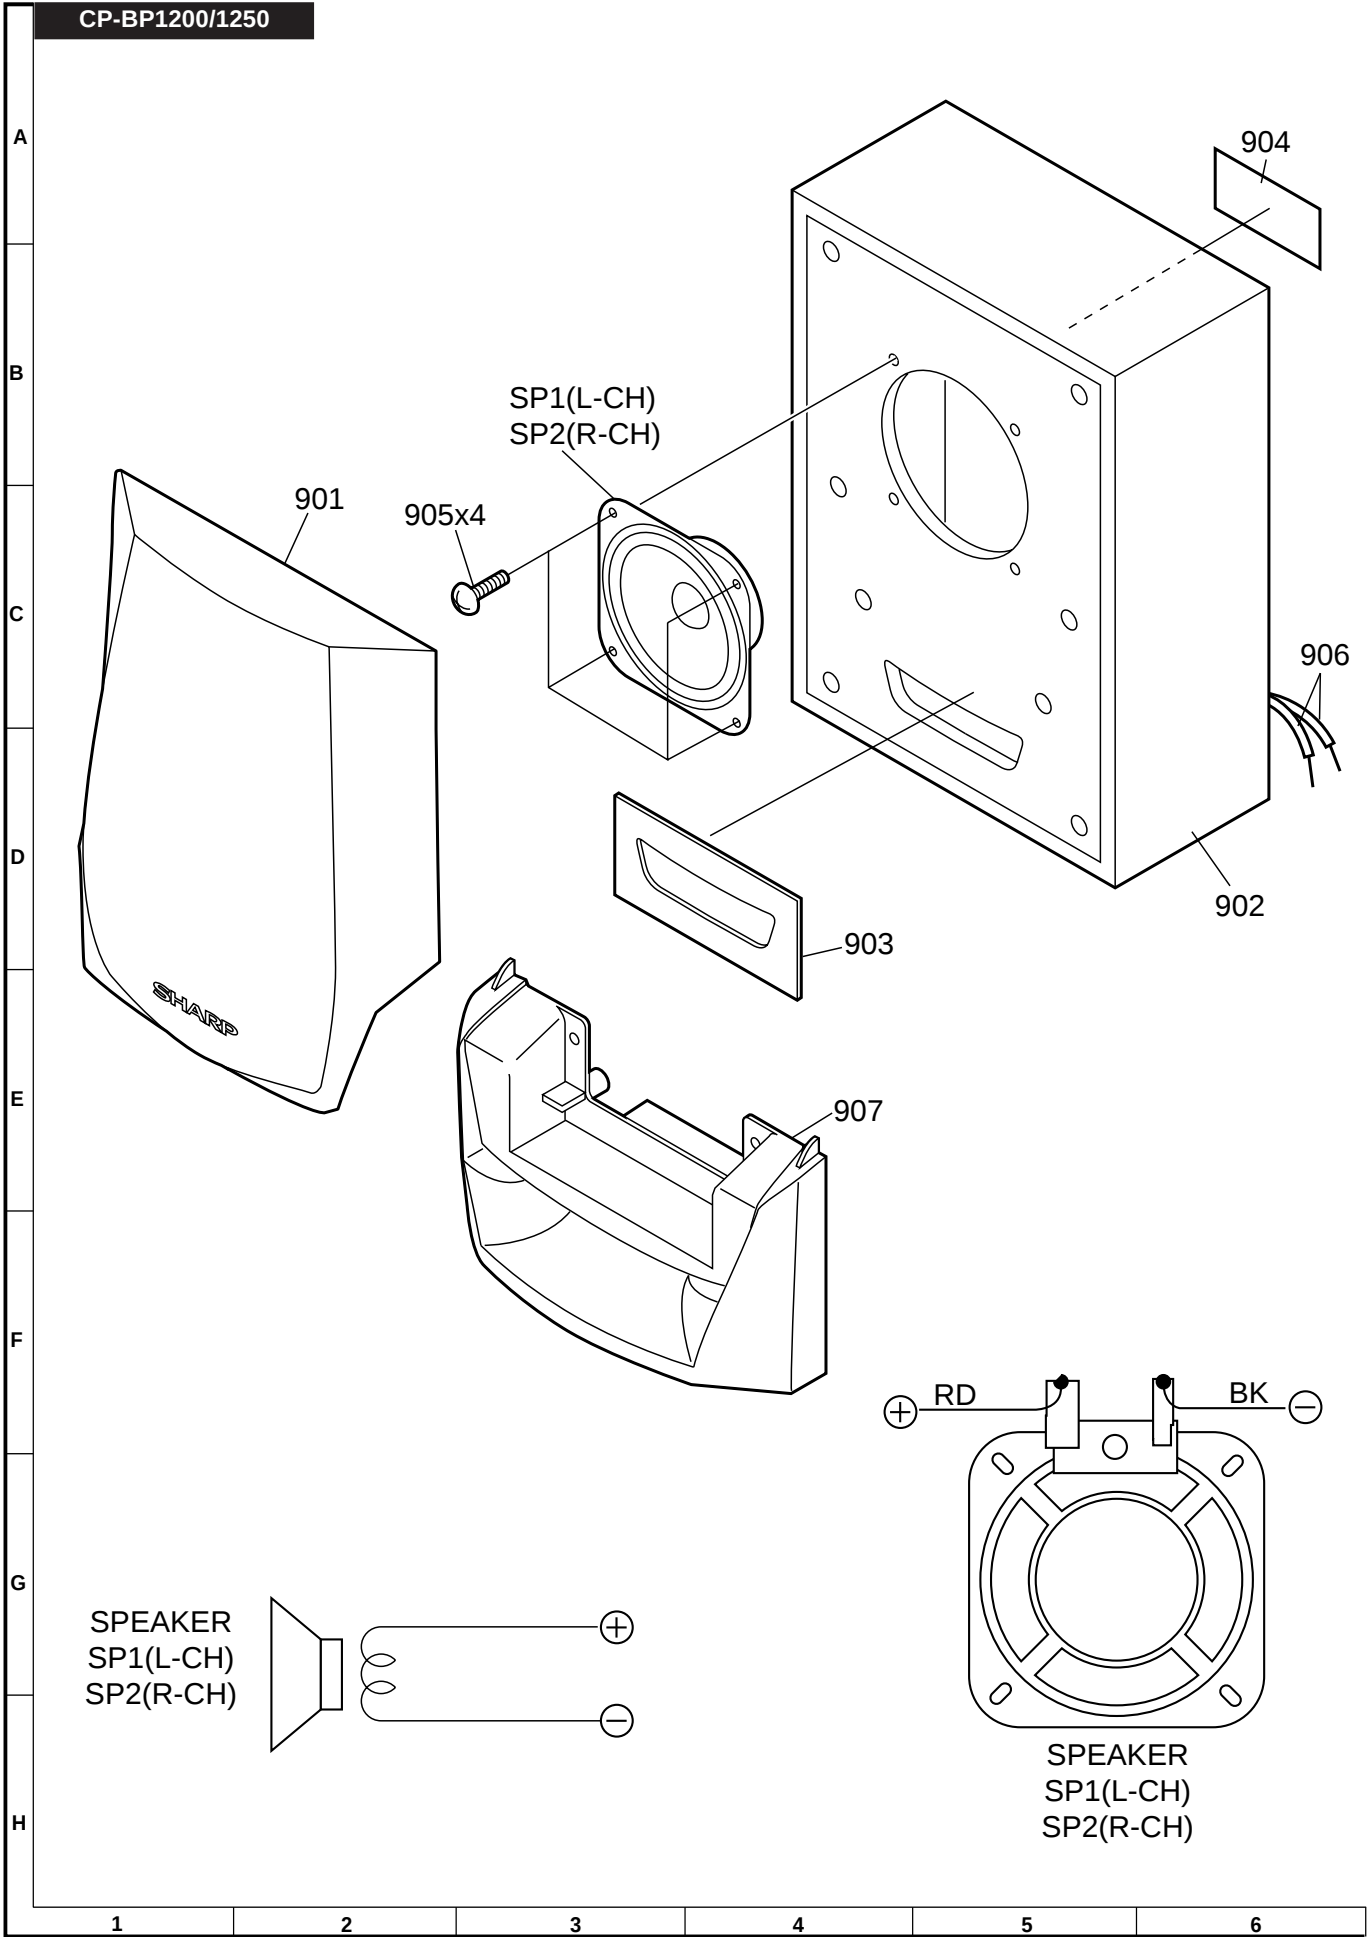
SPEAKER EXPLODED VIEW (1/2)
